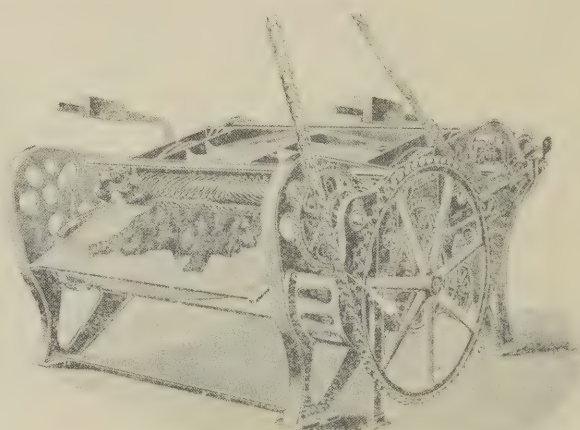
Putting-out machine, class B—the Turner Tanning Machinery Company
